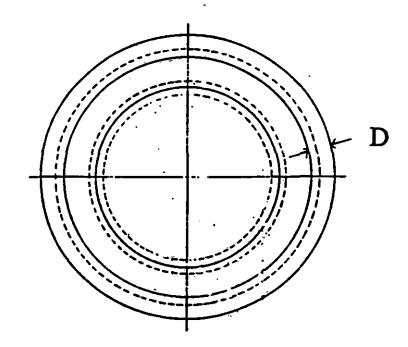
Type V - Plate, Sating (bread and butter, or dessert) NSN 7350-01-256-1086
